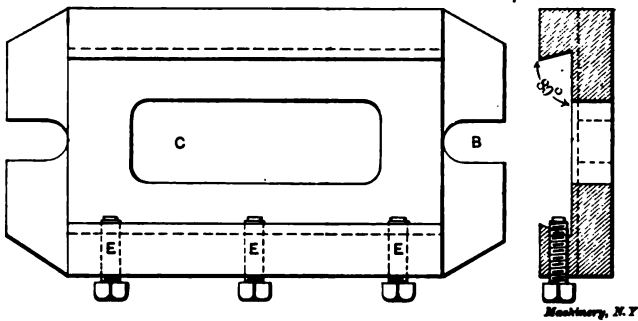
Die-bed of the Style commonly used in Jobbing Shops
